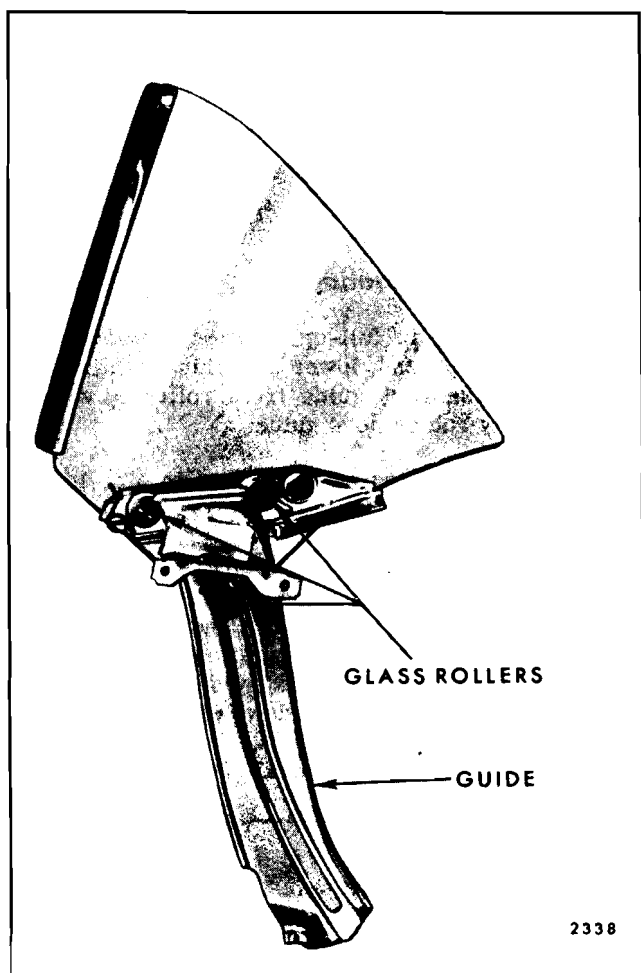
Rear Quarter Window and Guide Assembly - "F" Styles
